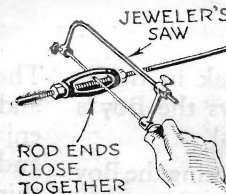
A jeweler's saw will save time when a turnbuckle has reached the end of the adjustment. These blades will easily cut through all sorts of brake rods
